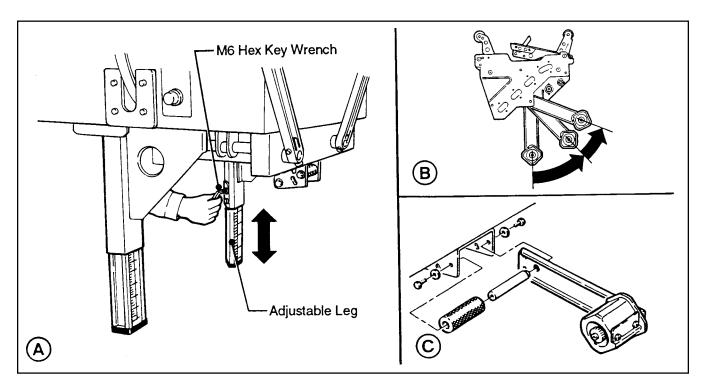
Machine Bed Height Adjustment and Lower Tape Drum Bracket Position
